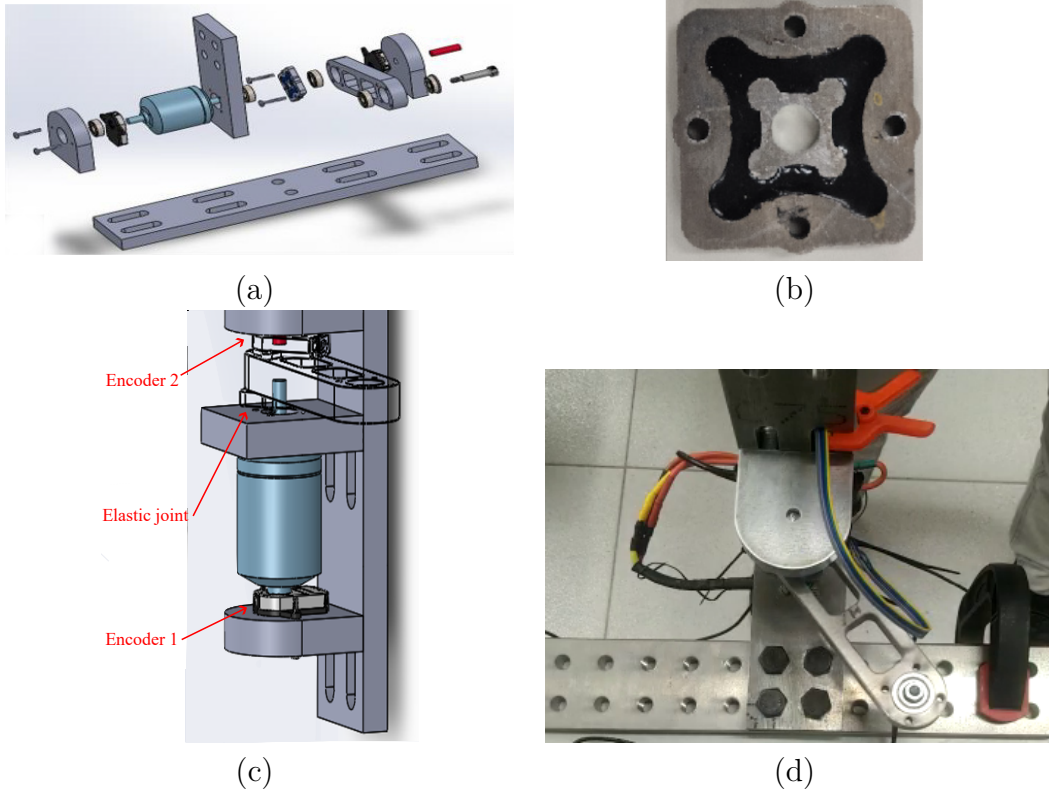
(a) Assembly exploded view. (b) Elastometer-based elastic joint 55A. (c) Assembly detail. (d) Assembled eSEA.
